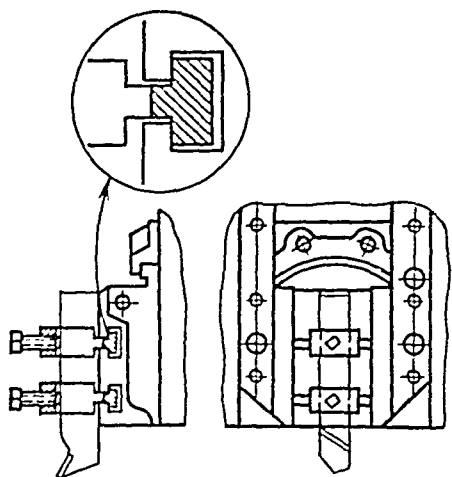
Clamping single-point tools on the tool block of the tool head on a planer
